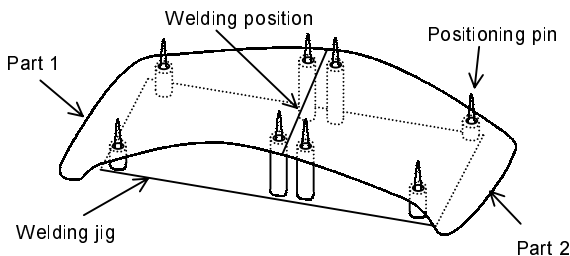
Conceptual Sketch of the Welding Jig with Parts Attached
